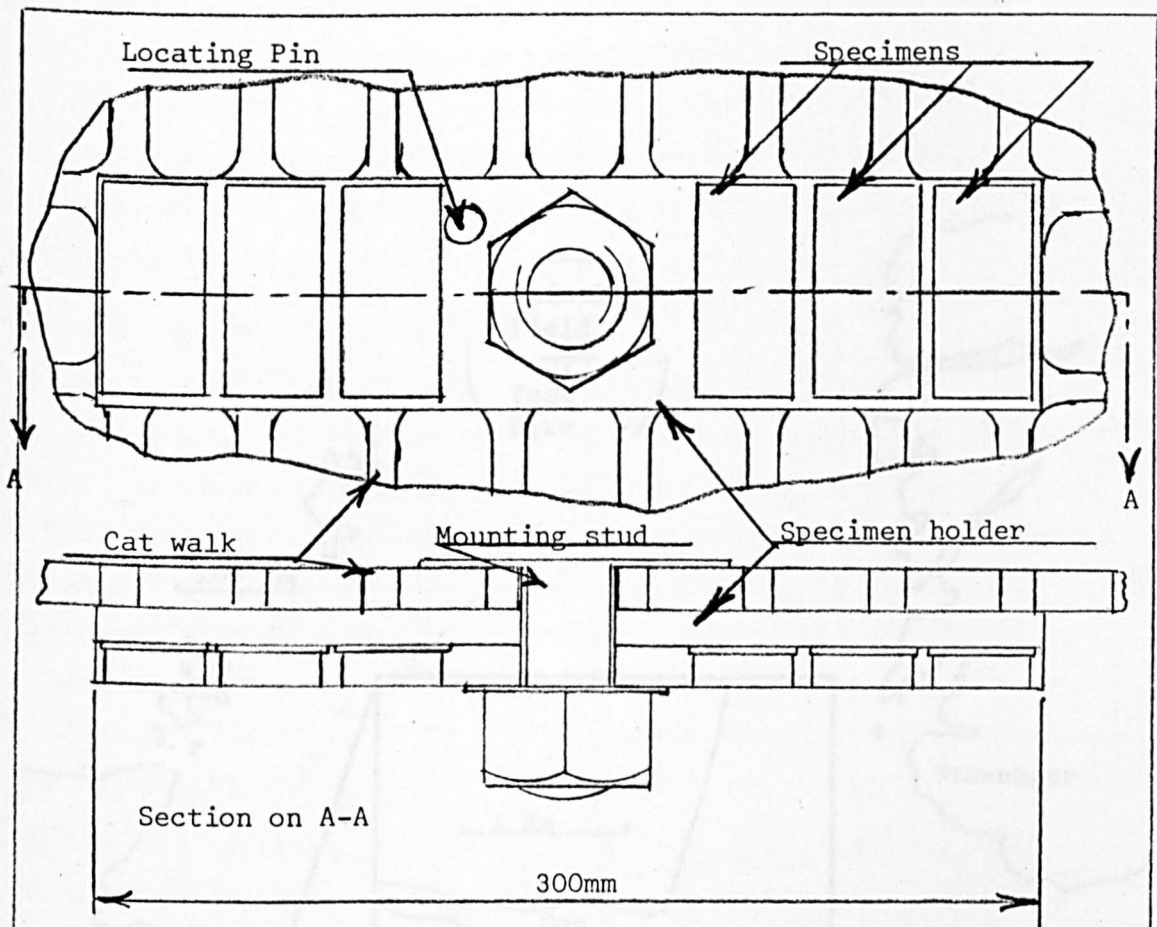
Detail of Deep-Water Specimen Mounting
